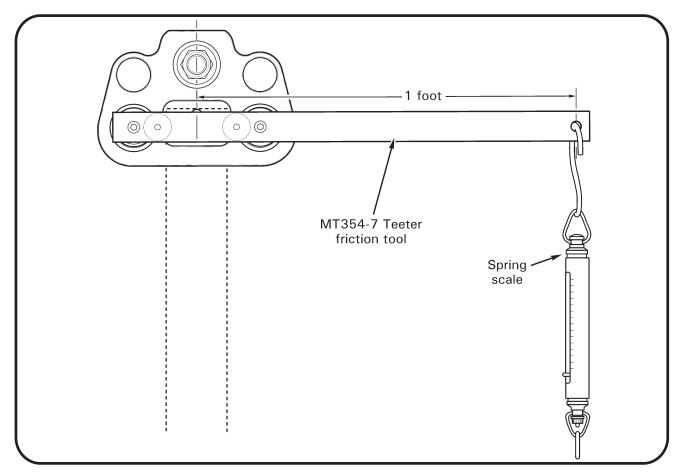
MEASURING TEETER HINGE FRICTION
